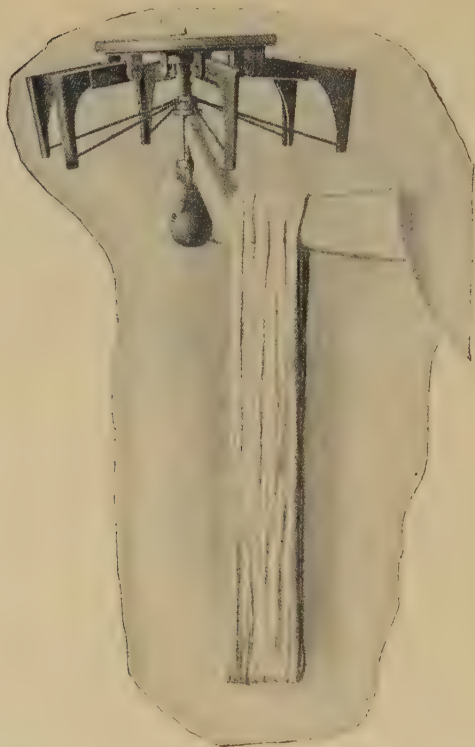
Single and Double Winding Collapsible Reel. Haubold Design.
